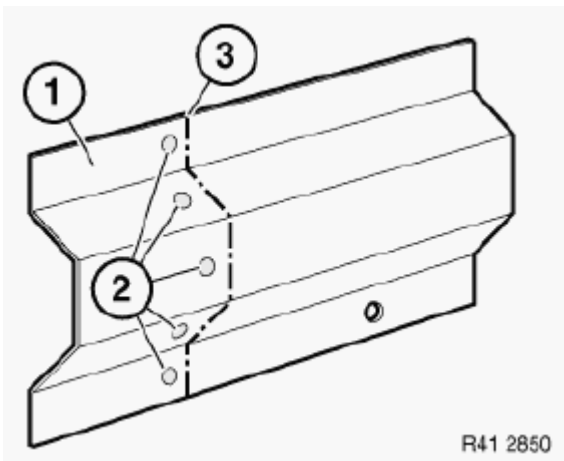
MAG Weld Joint And Plug-weld
